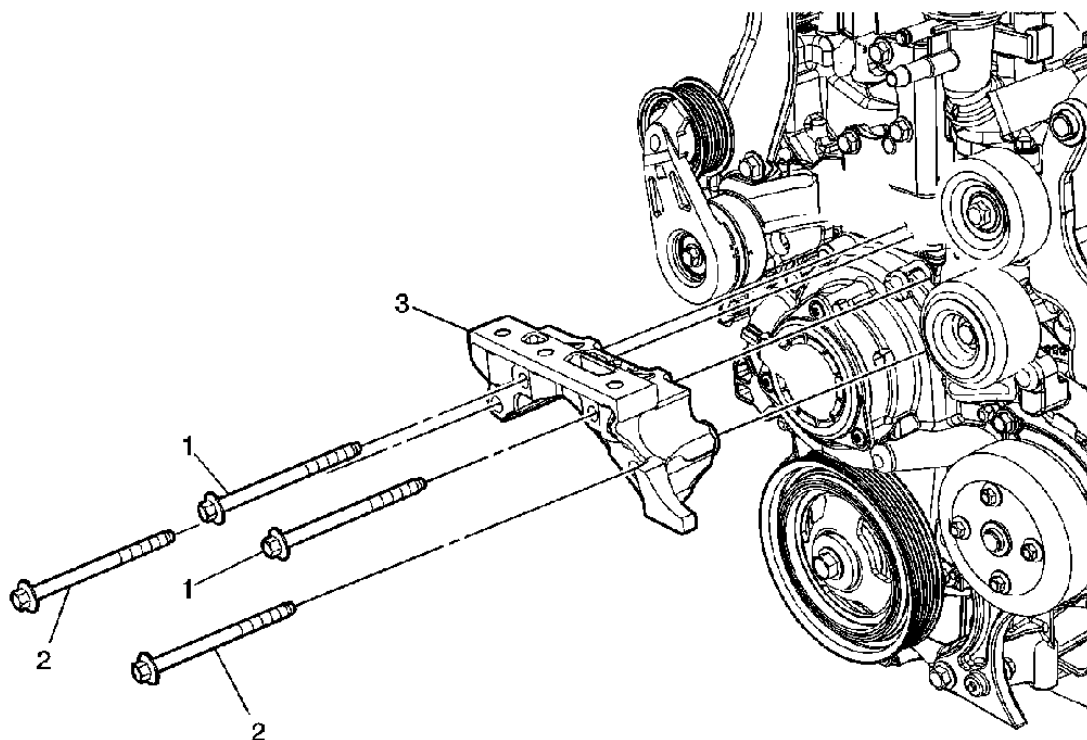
Engine Mount Strut Bracket (Engine Side)
